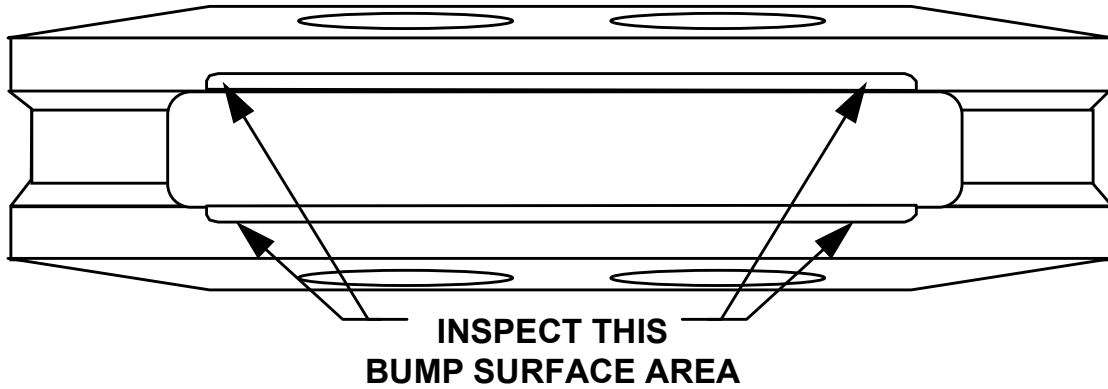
COUNTERWEIGHT BUMP SURFACE INSPECTION
